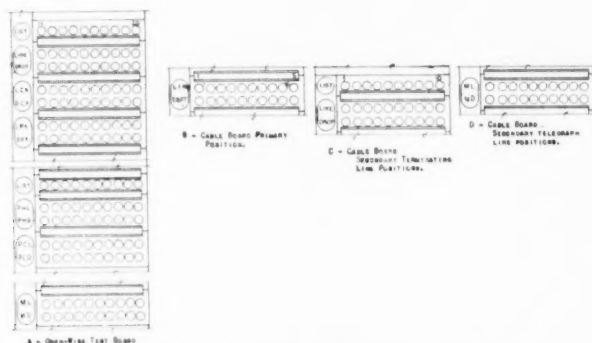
Typical Jack Assembly Arrangements at Test Board
